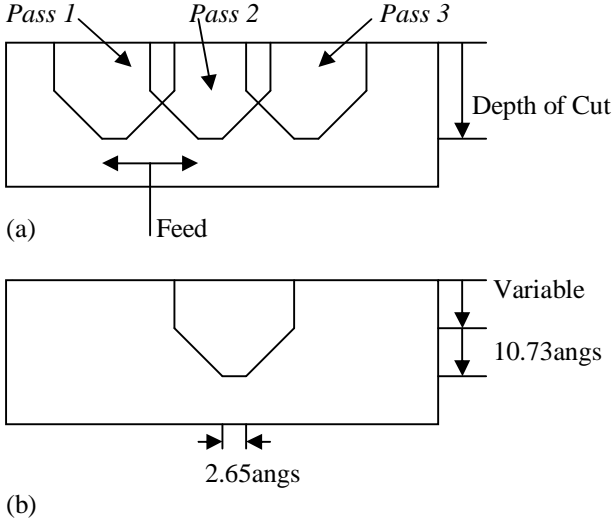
Cross Section of the Machined Grooves with Passes 1-3 (direction of cut is perpendicular to the paper face) 2b: Tool Tip Dimensions
